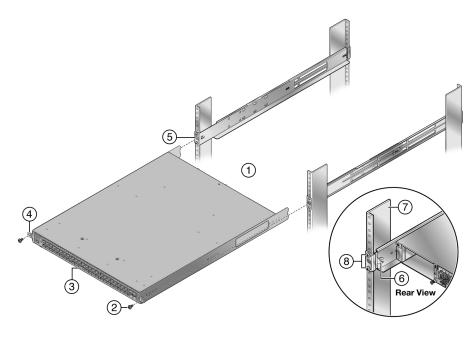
Installing the Chassis on to the Rack Mount Rail Assembly
